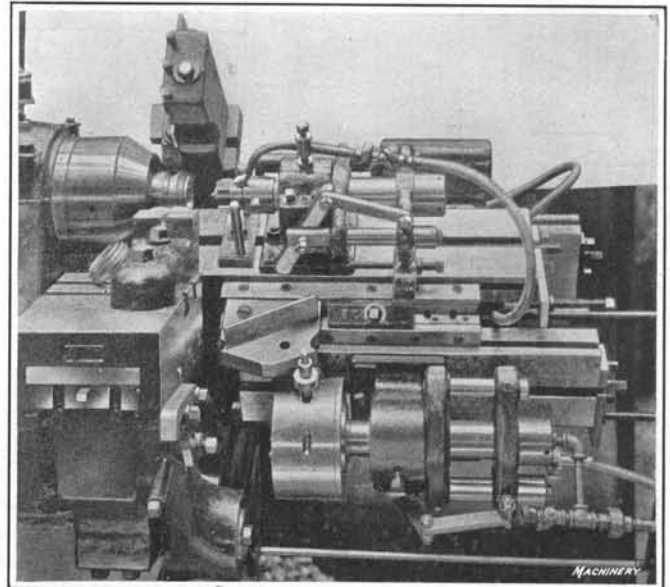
Collapsing Tap Fixture in Operation on Gridley Turret Lathe
